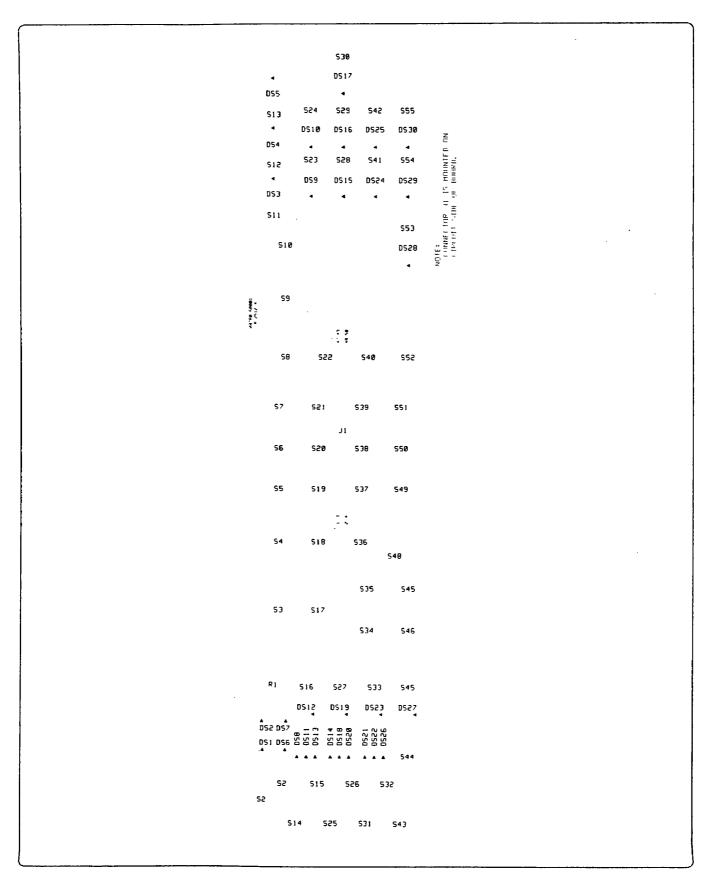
, A1A2 Keyboard Assembly Component Locations
